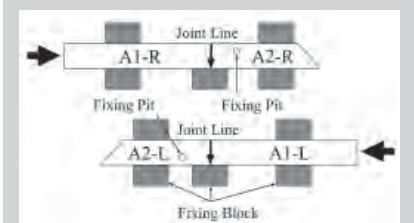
Method using FSW technique for welding columns.^{2,3}
